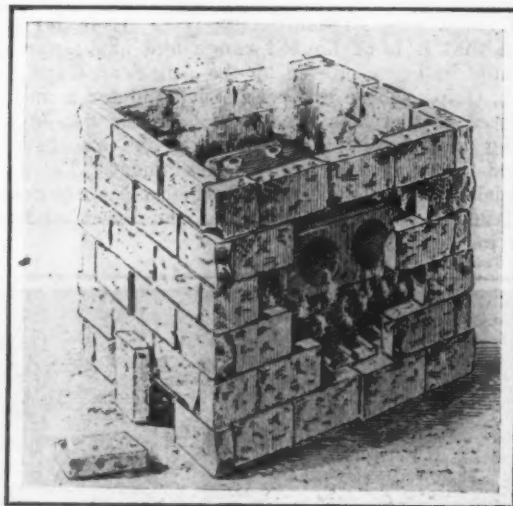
Typical Preheating Oven for Preparing Cast Iron for Welding. An automobile cylinder block is contained in this furnace
